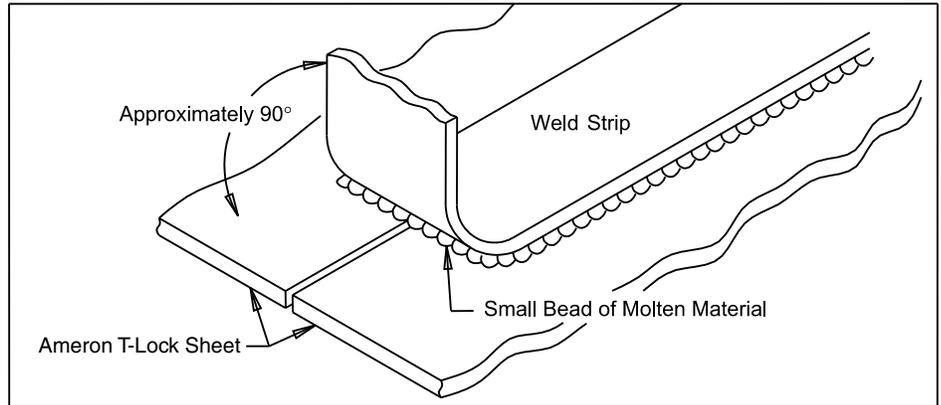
This figure details only a typical butt joint. The procedure for welding a lap joint is identical, except for the manner of positioning the weld strip.
